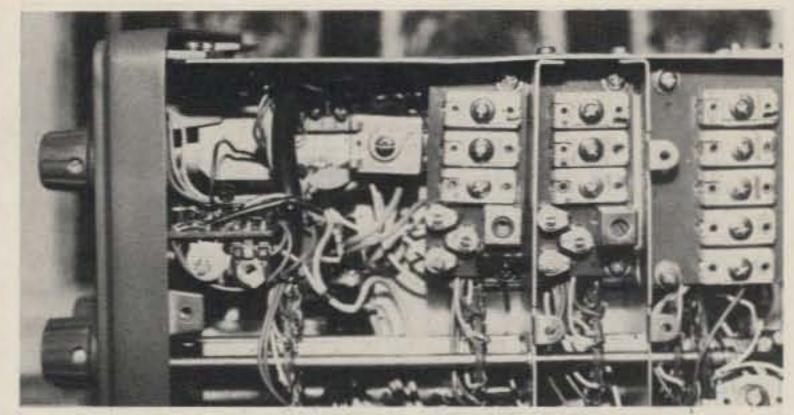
Photo D. The new trimmer capacitor may be soldered directly to the trimmer unit A circuit board.
